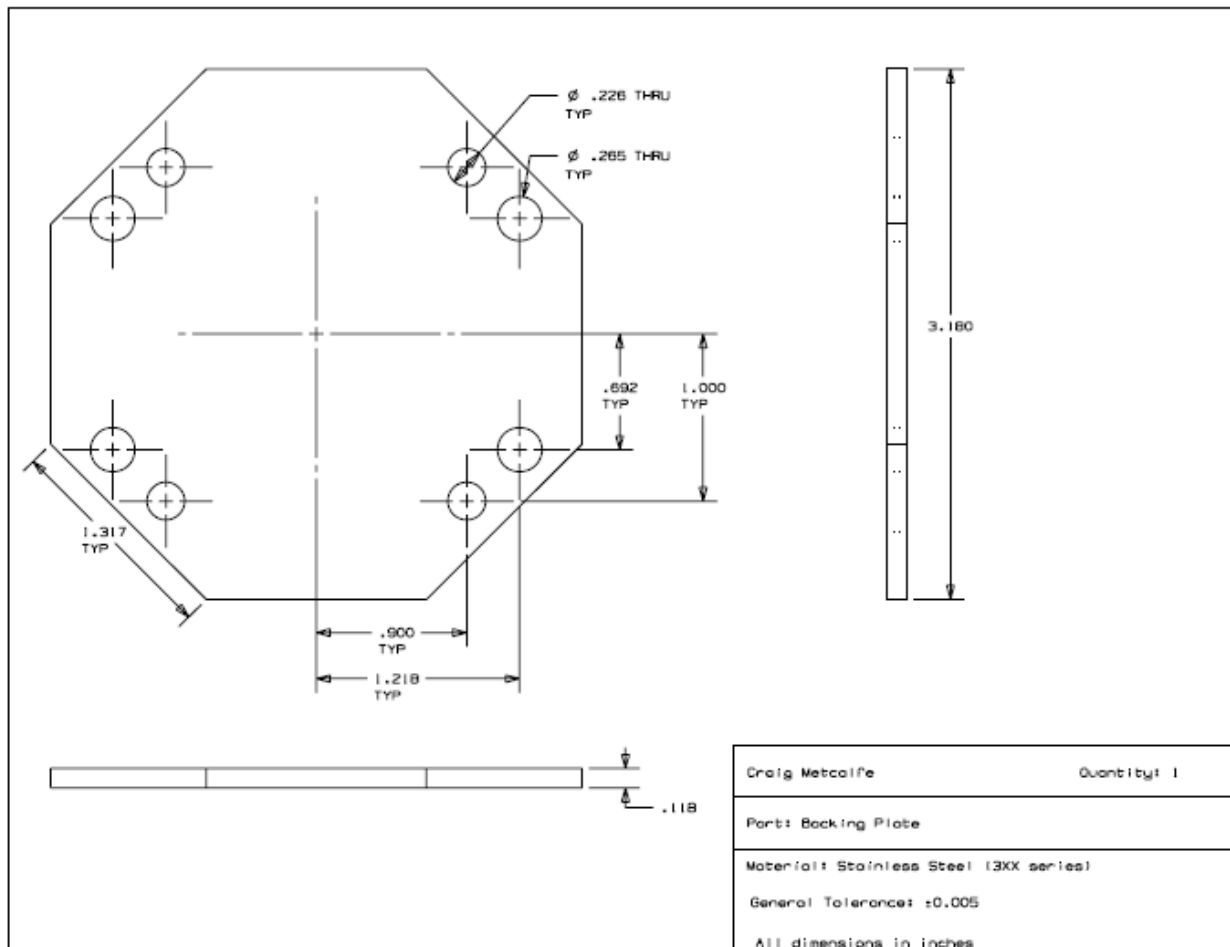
Mechanical drawing of Lower Plate (part 3)
